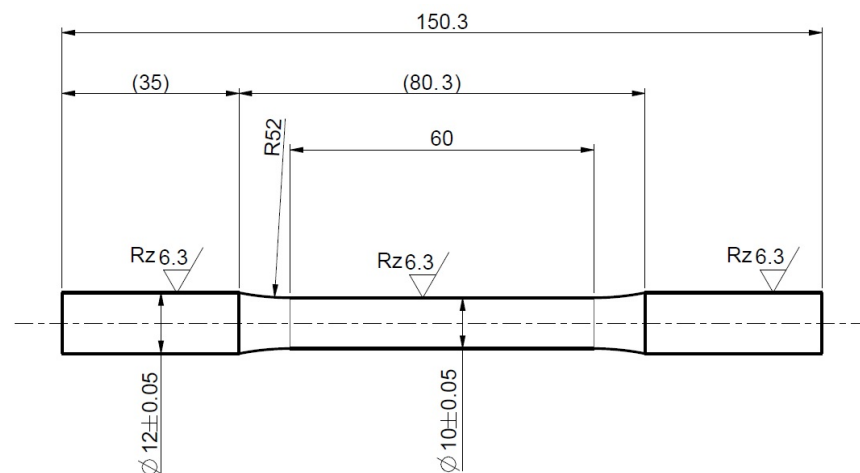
Tensile test specimen geometry, with dimensions in mm.
